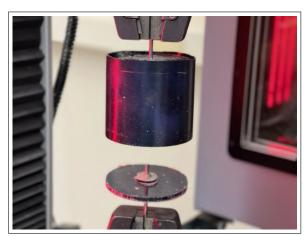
Bulkhead Pull-to-Failure Tensile Test
